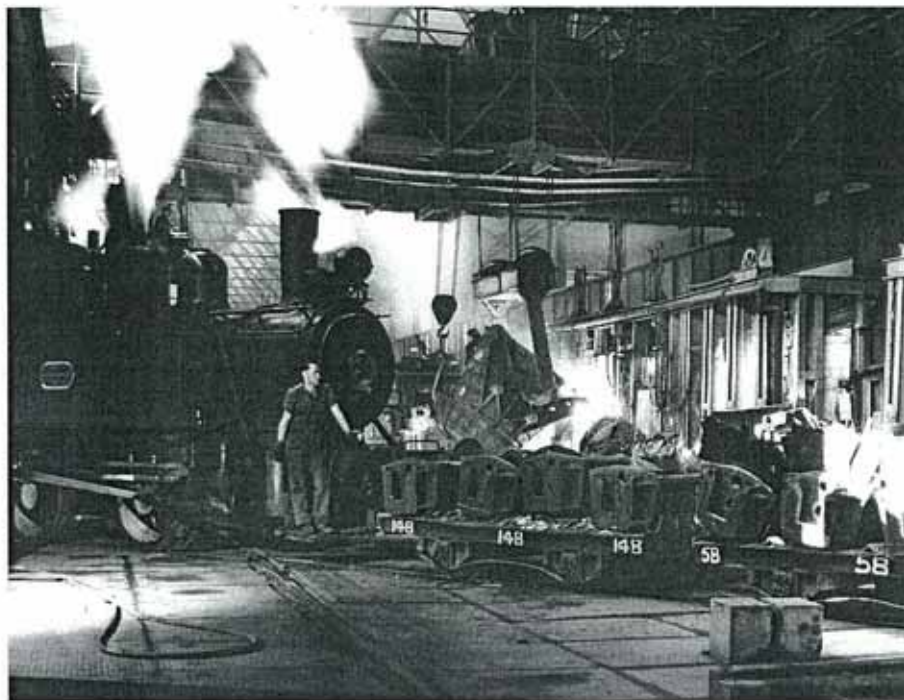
Scrap being delivered for charging into Open Hearth Furnaces by a Works' locomotive. Beyond, a furnace is being charged with molten pig iron from a 38 ton ladle. (1948)
